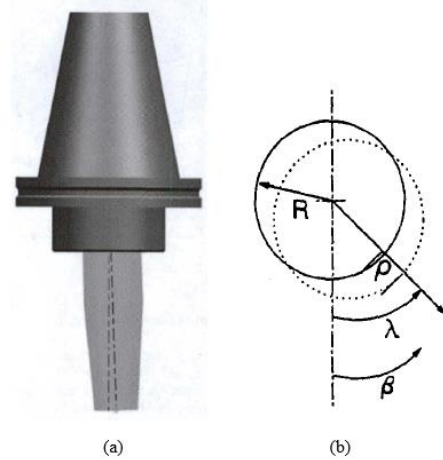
(a) cutting tool with axial run-out [13] (b) cutting tool path with radial run-out [14]
